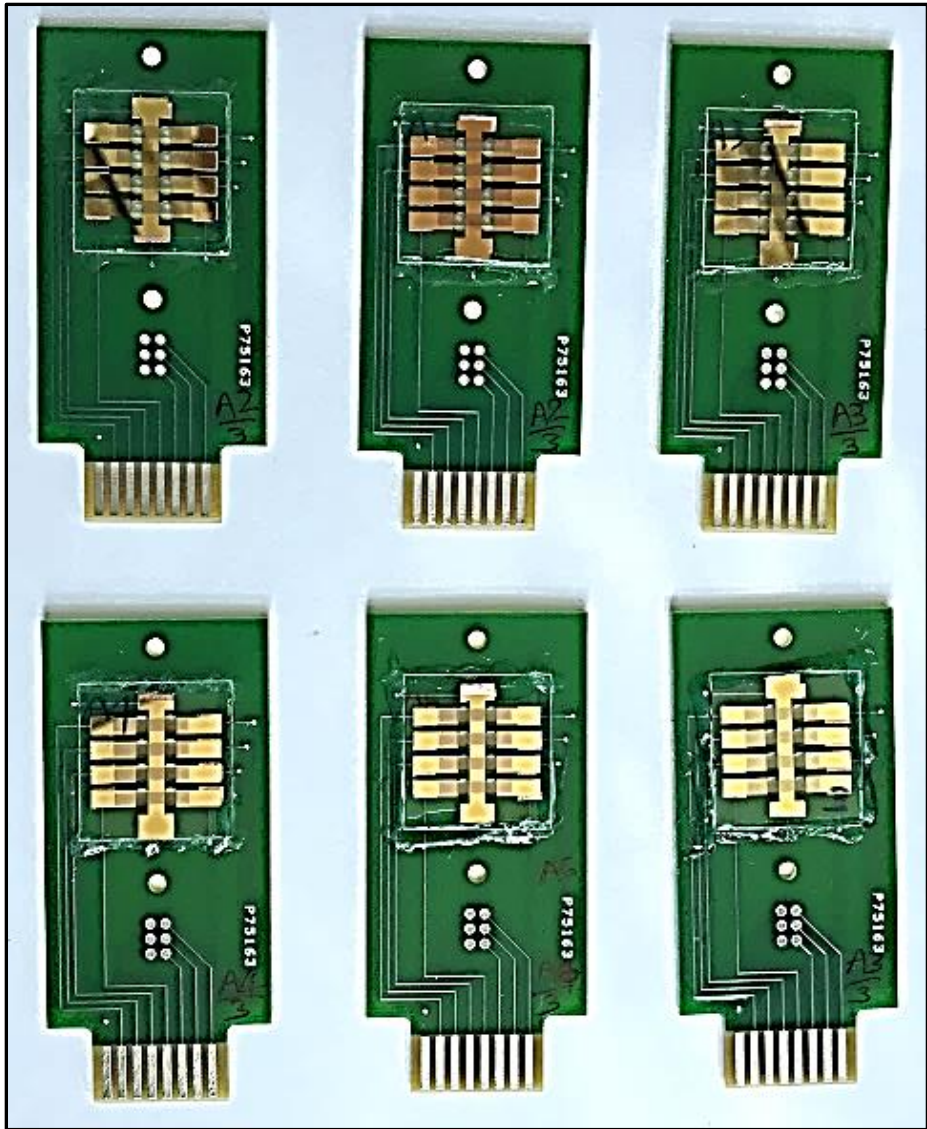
(j) Ozone gas sensor arrays mounted on the PCB
